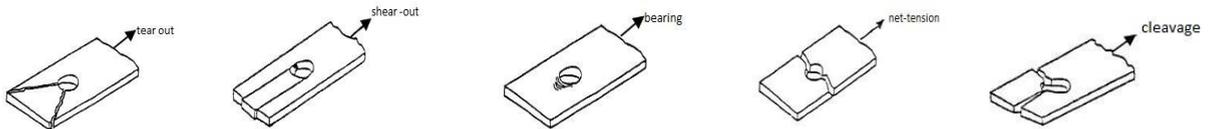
Bearing test failure modes for ASTM D5961/D5961M-05:
